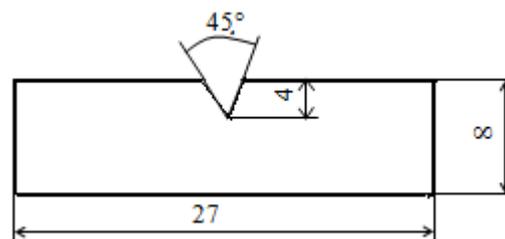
Shape and dimensions of the modified bending test (modified notch toughness test) specimen.
